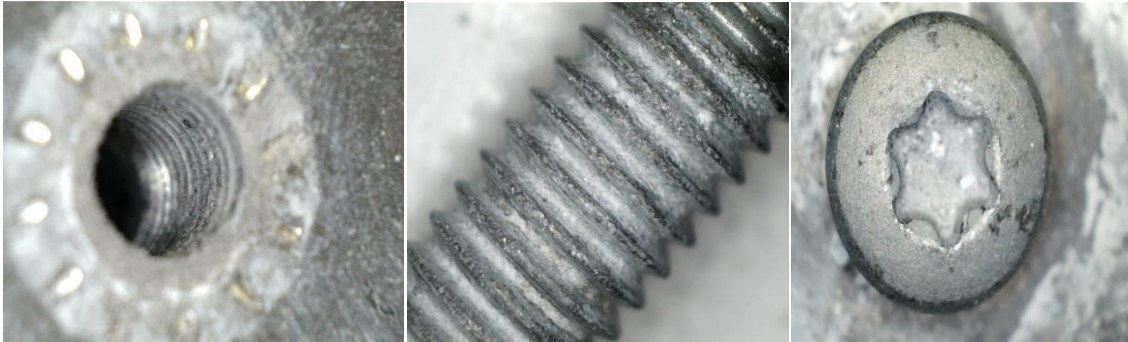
SUS304 Geomet, thread and head of the screw after salt fog test
